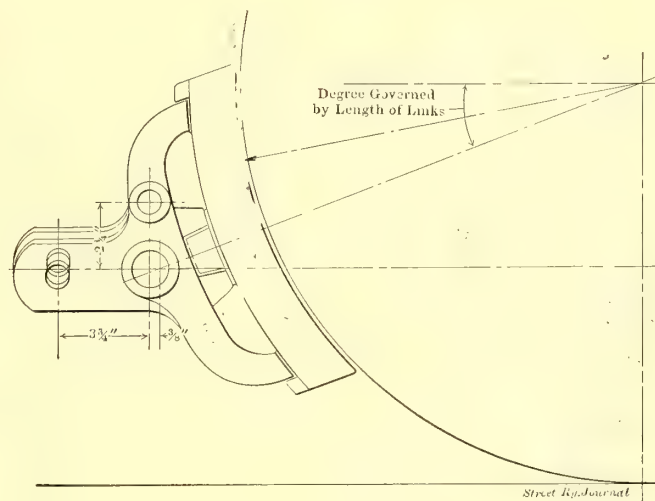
PIVOT POINT ON BRAKE-SHOE HEAD A TRIFLE BELOW CENTER LINE OF HEAD
